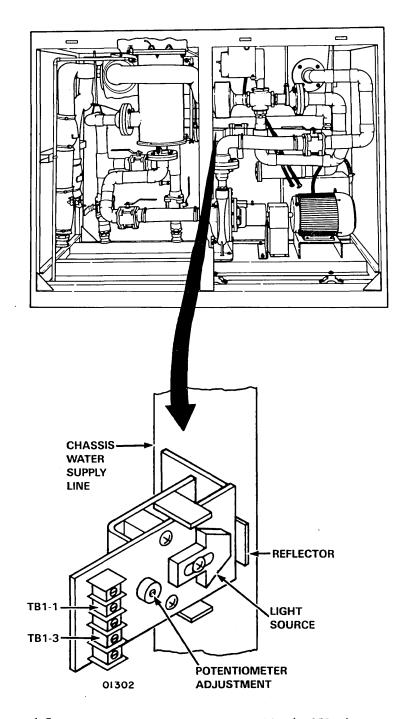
Low-temperature Sensor Assembly (GH252-A)
